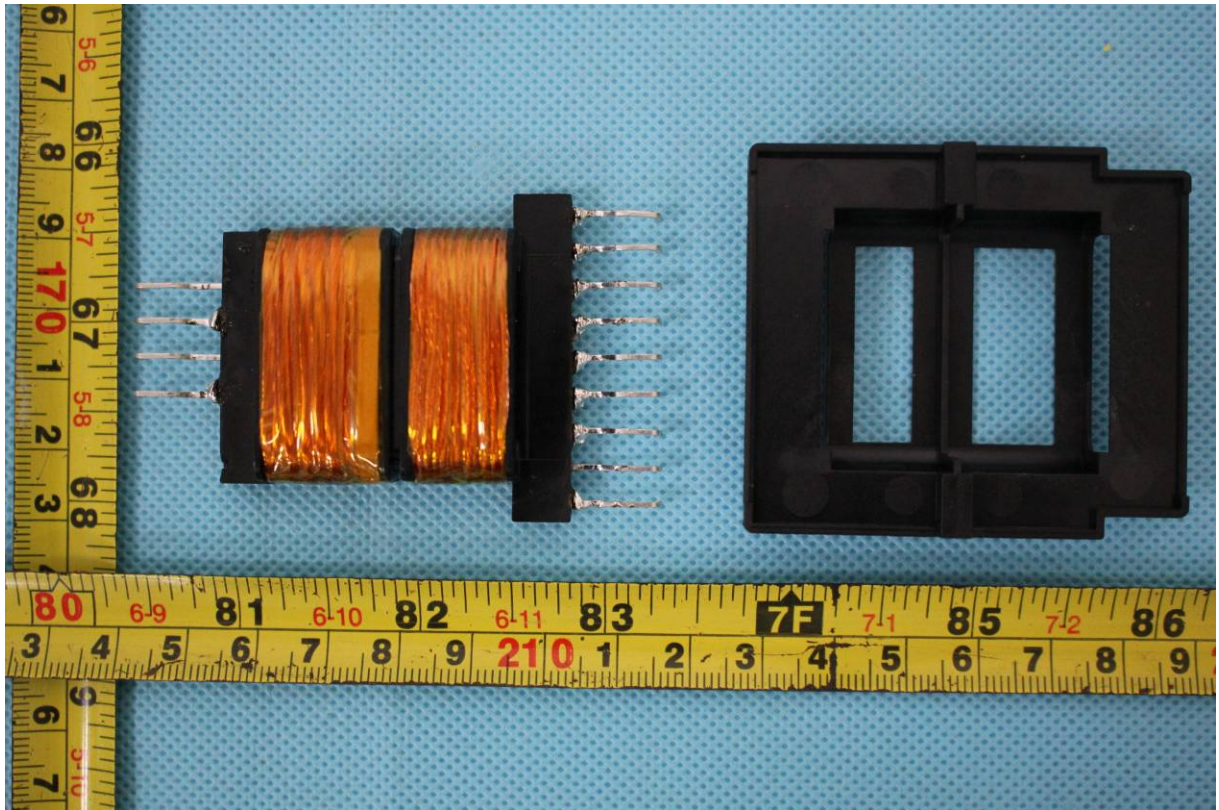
Transformer T3 (with top cover sheet removed, min. 2.5 mm margin tape used between primary winding and middle bobbin)
